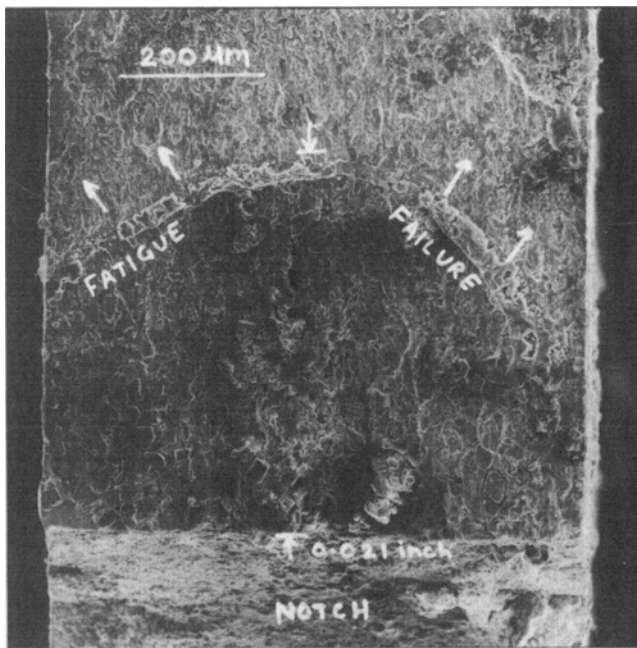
Scanning electron micrograph of the 2024 fracture specimen ($K_t = 3$ and 4 days of pre-corrosion) showing corrosion fatigue failure
